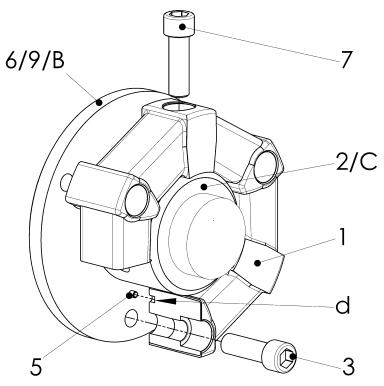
Mounting the rubber element (Type 008A-00016...00200-.N..)
